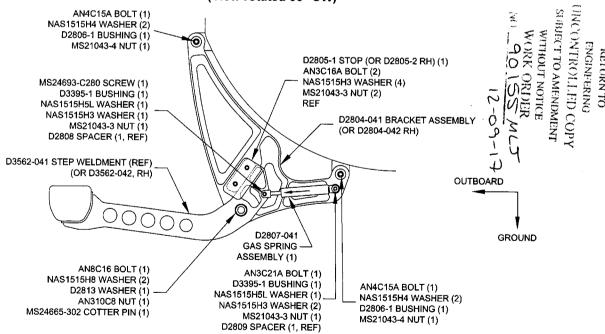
STA 155.06 for D412-630-033/-034 Heli-Access-Step[™] Installation (View rotated 90° CW)
